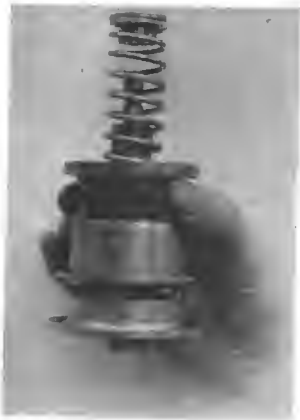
Combined Inlet and Exhaust Valve as Used on Esnault-Pelterie Seven-Cylinder Aeronautical Engine.
